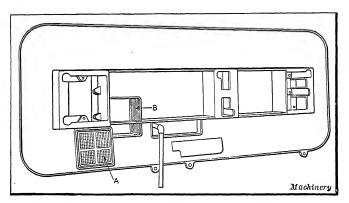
Oil Pan used on Automatic Screw Machines showing Efficient Strainers to insure Complete Removal of Chips
